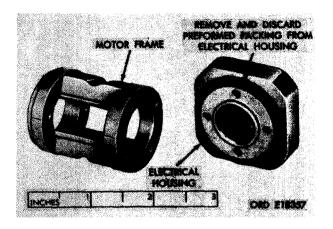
REMOVING ELECTRICAL HOUSING.
